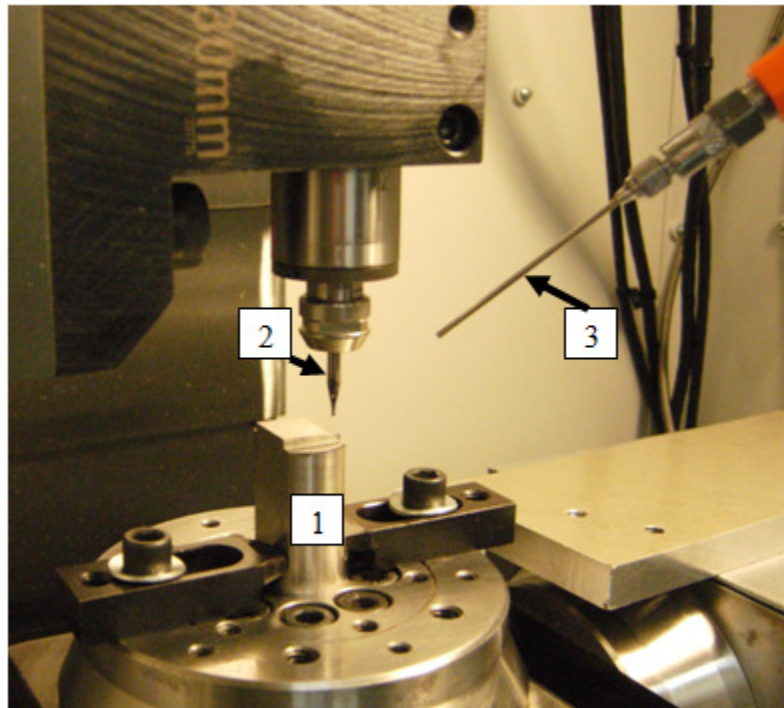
Setup during machining SS316L using a two-flute WC end-mill. 1) Workpiece; 2) 1.016mm two flute microend-mill; 3) mist nozzle.
